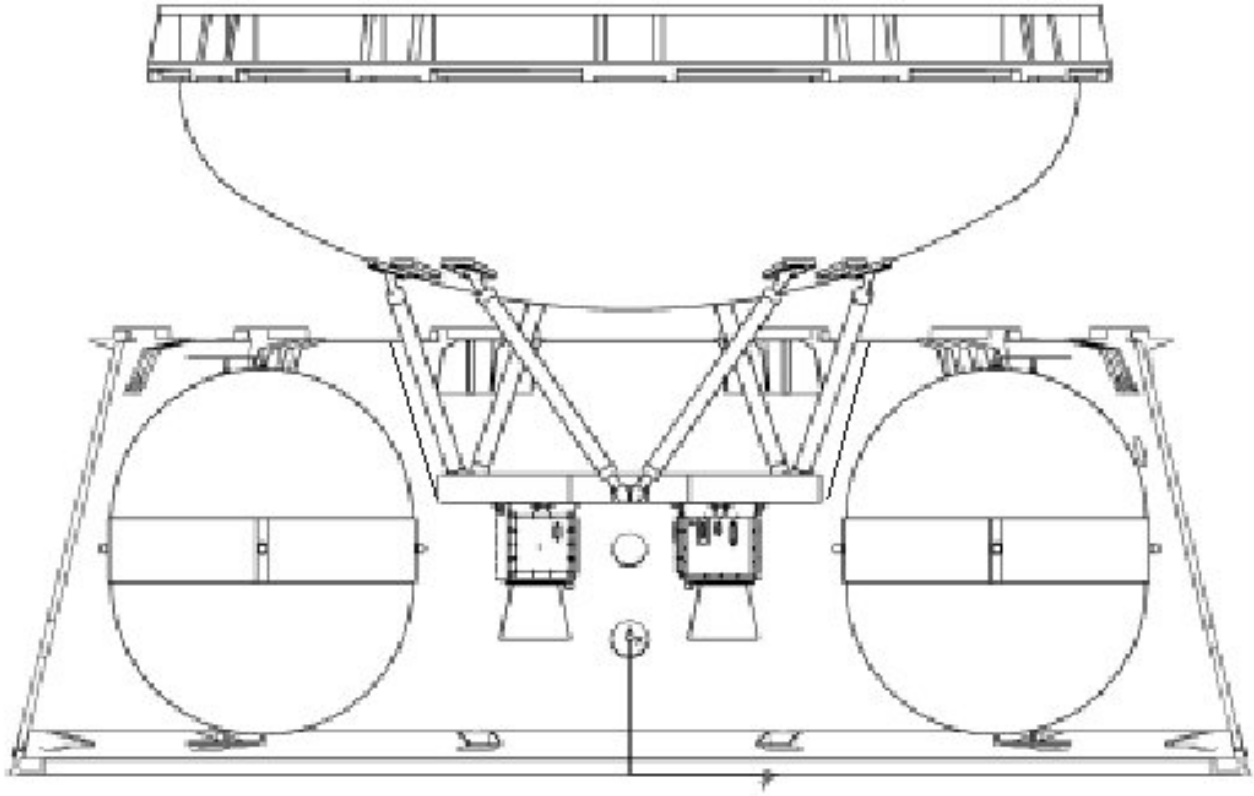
HERSCHEL – Internal STR assembly View
